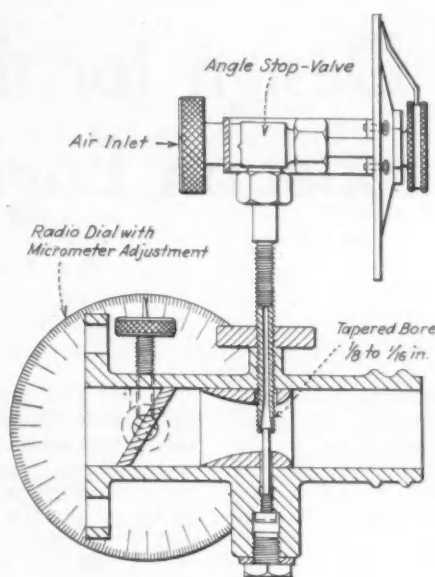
LONGITUDINAL SECTION THROUGH THE DOBBS CARBURETOR
